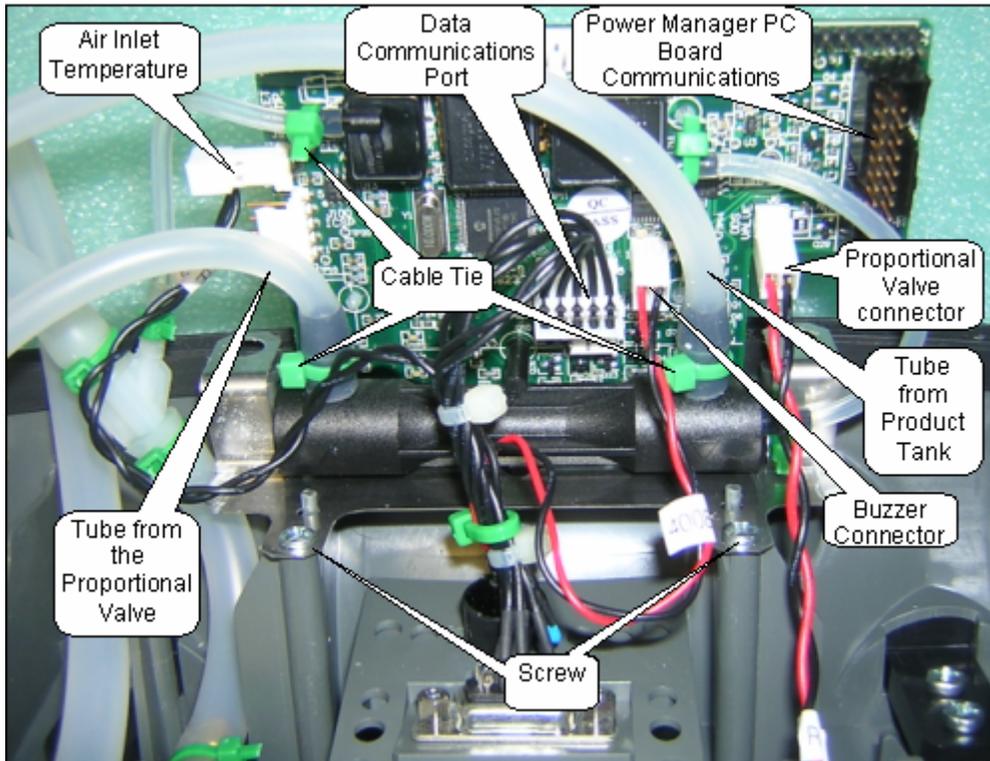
Control Module Removal (ATF Module not shown for clarity).
